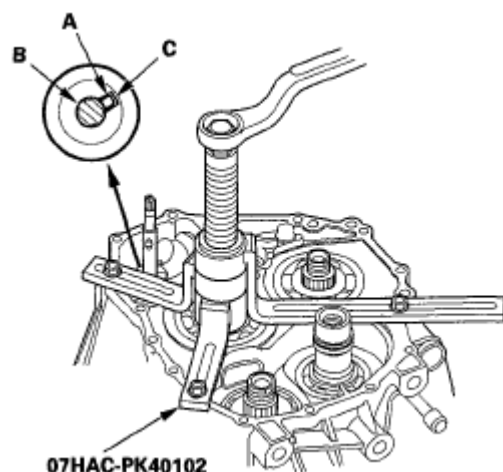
Aligning Spring Pin On Selector Control Shaft With Transmission Housing Groove
